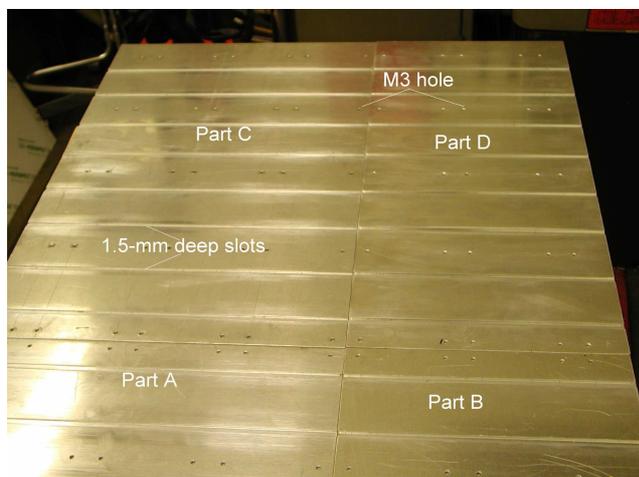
Construction of the rear aluminium back plate. Four aluminium plates of 3mm thick were screwed to a single aluminium plate.
